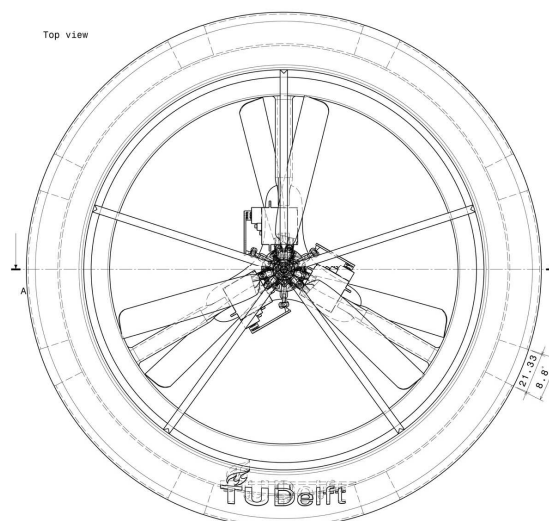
Top view drawing of the scoutDROID, dimensions in mm
